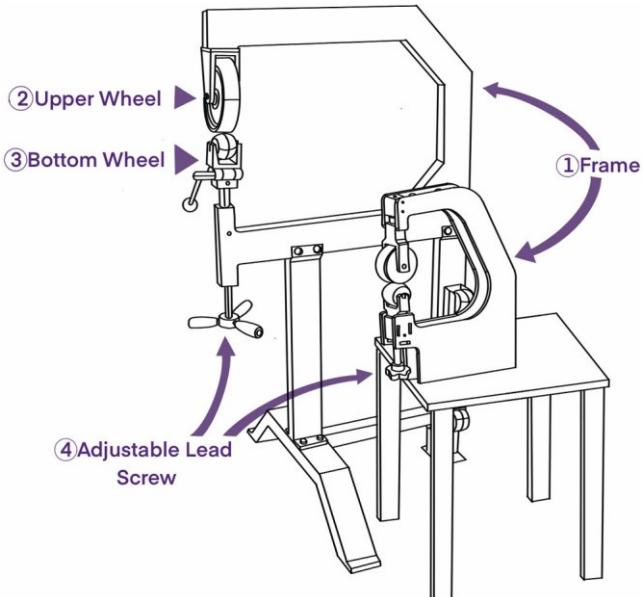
Traditional English wheels are shown. Key elements are labelled. Larger English wheels typically boast larger forming forces as the frame is stiffer. Mini-English wheels have the advantage of being able to form smaller parts.
